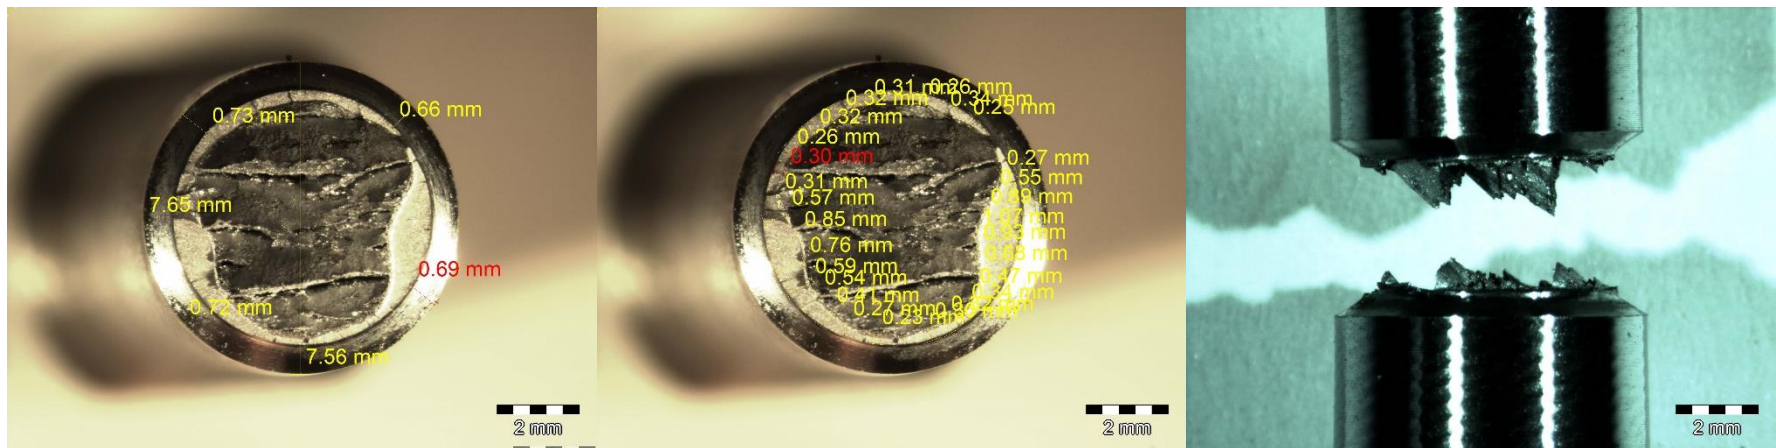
Cross-sectional and side view of fractured StxCRRB-02
